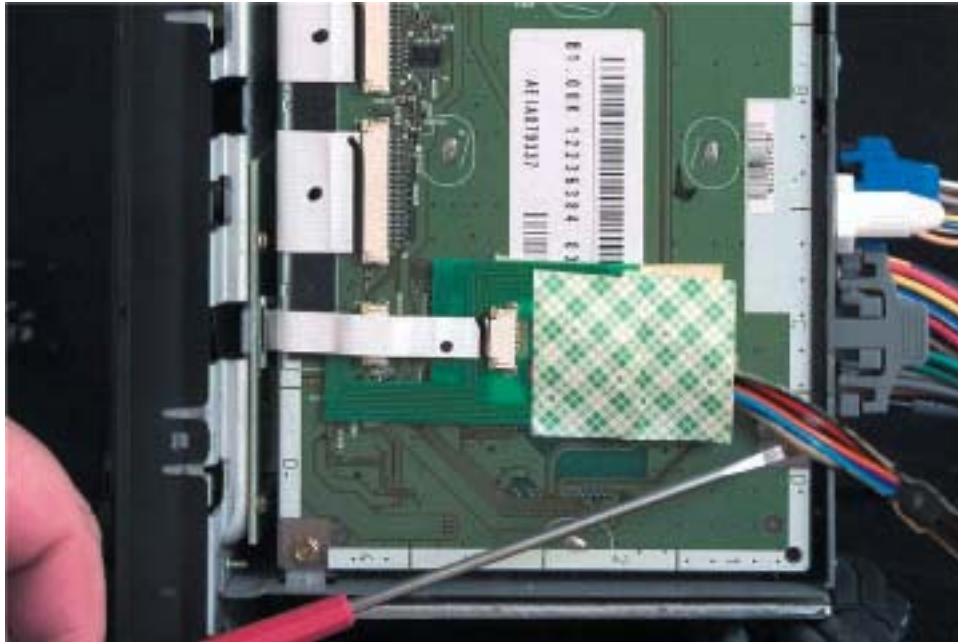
re-check all of the tabs are locked and the connectors are seeded properly. Check the cable to the RGB interface is sitting correctly in the small opening at the edge of the radio. At this point return the bottom plate to the radio – popping the plate into position until it is secure. The radio is ready to be replaced after the interface plug (A–below) is connected to the RGB interface box shown on page 1.
